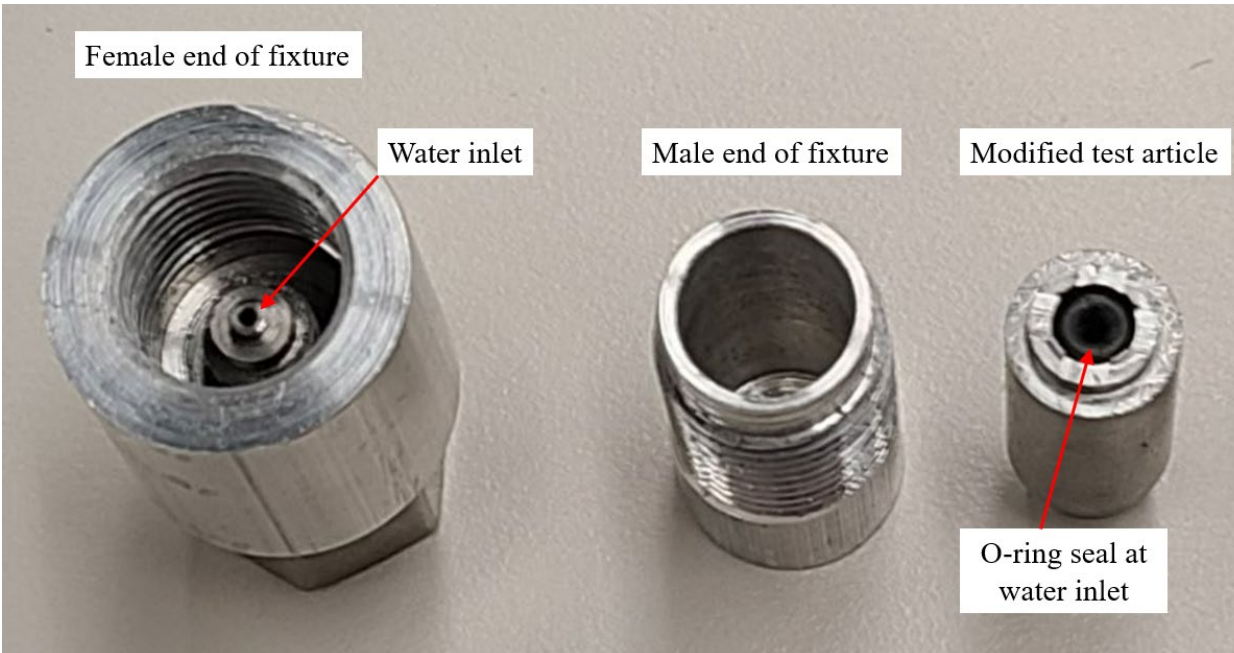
Constituent components of the piping fixture, showing modified test article with O-ring installed.
